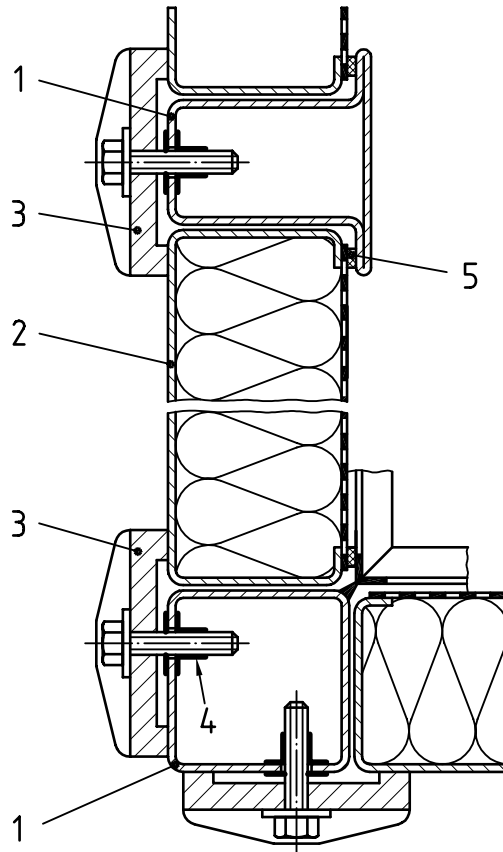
Example of vertical connection of enclosure wall elements
